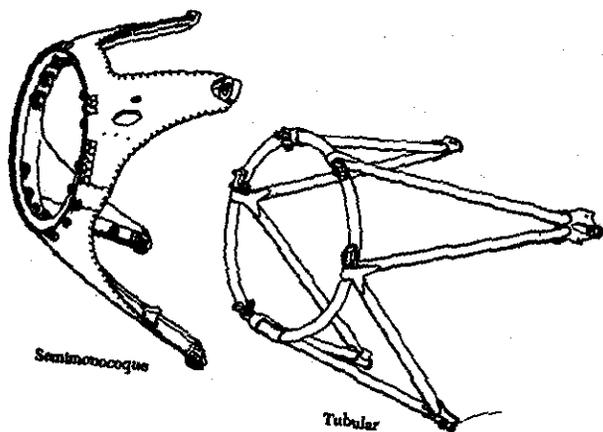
Semimonocoque and welded tubular steel engine mounts.
